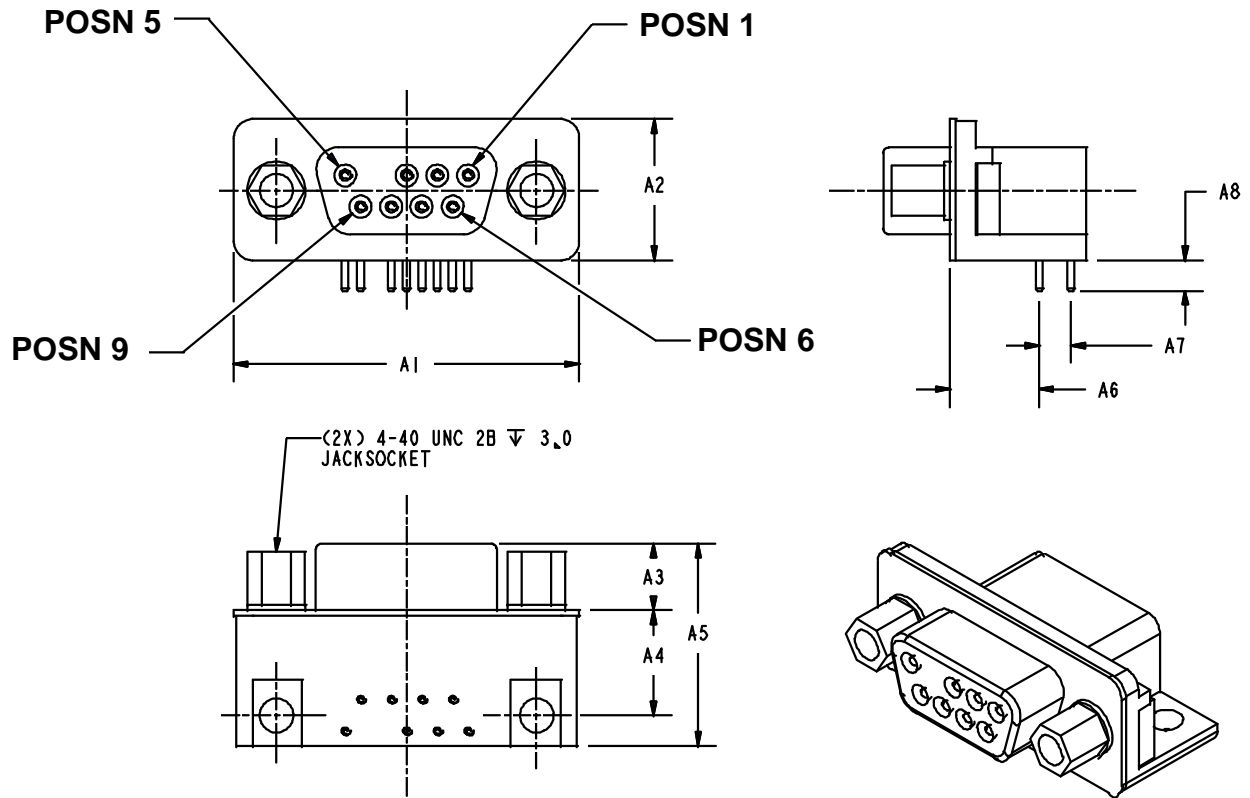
Fixed board right angle through hole (version 1) overview and outline dimensions
